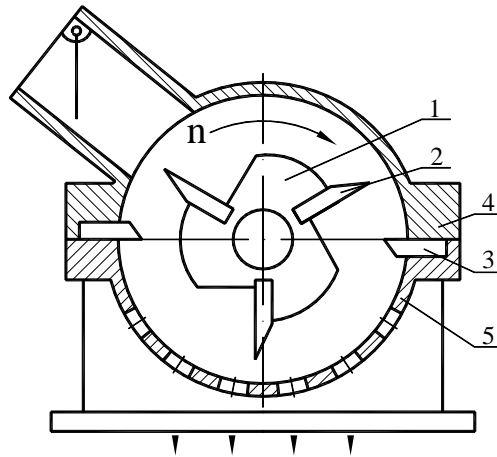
Rotary knife shredder: 1 – rotor; 2 – rotor knives; 3 – case; 4 – grid; 5 – stator knives [own study]
